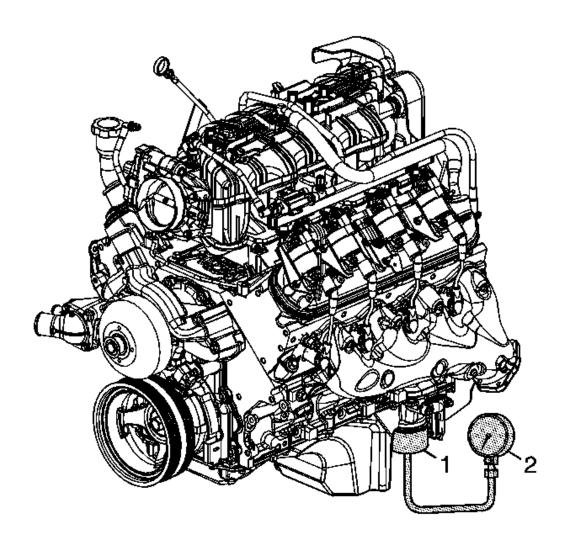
View Of Special Tools: Oil Pressure Gage & Adapter Courtesy of GENERAL MOTORS CORP.
